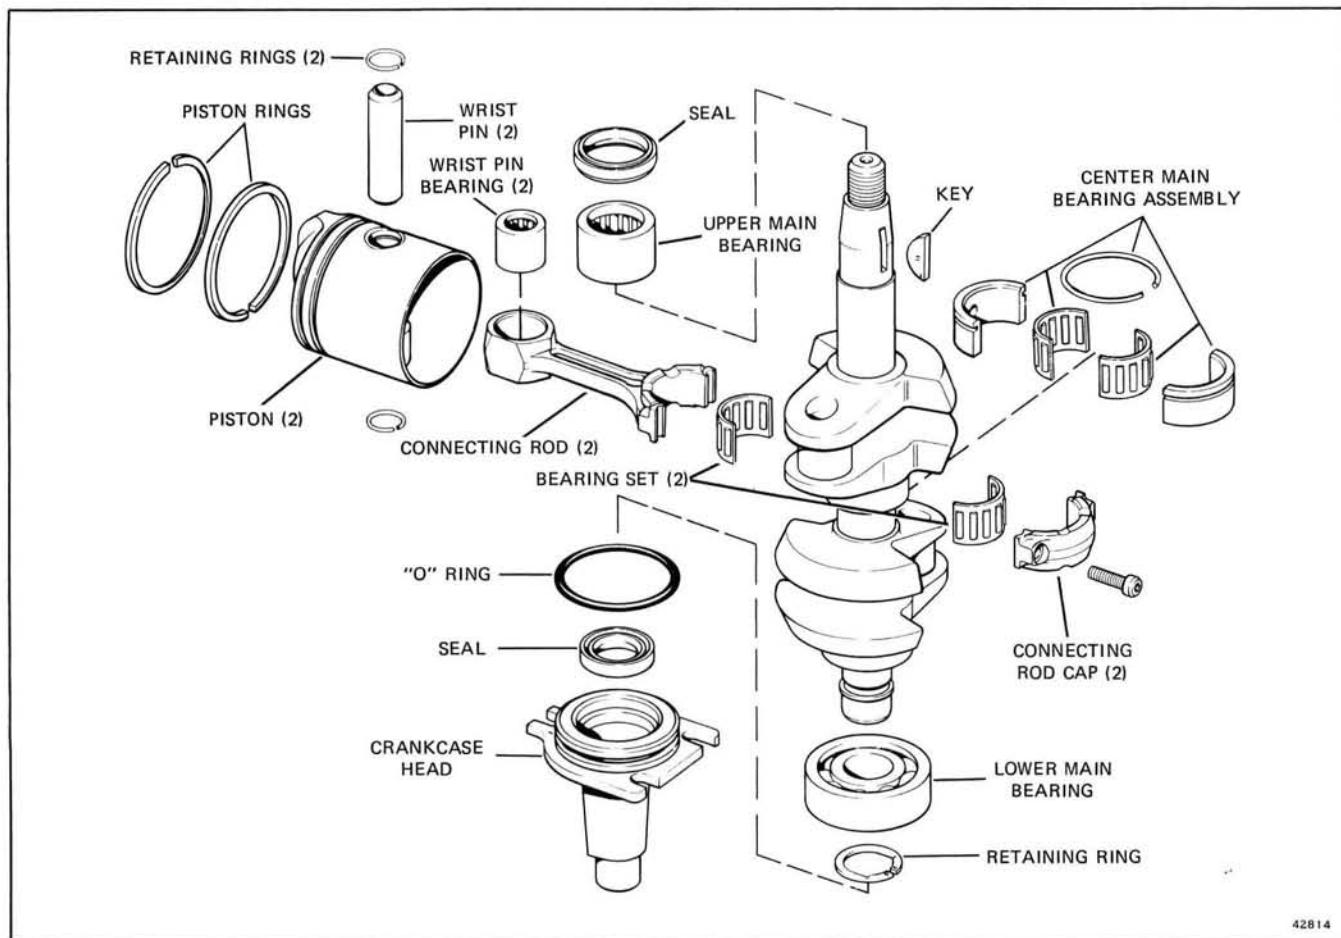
B. Crankshaft, Pistons and Connecting Rod Components
